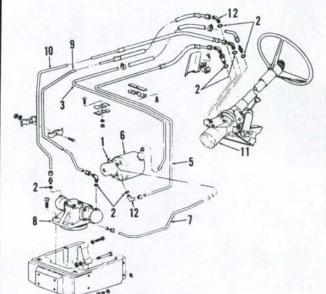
hydrostatic power steering system with integral hydraulic pump and reservoir. Refer to Fig. 4 for identification of components. Steering motor (11) is pressurized from tube (5) to lower port. Upper port returns unused fluid through tube (3) to reservoir (6). Tubes (9) and (10) are routed to front steering motor (8) from side ports.
